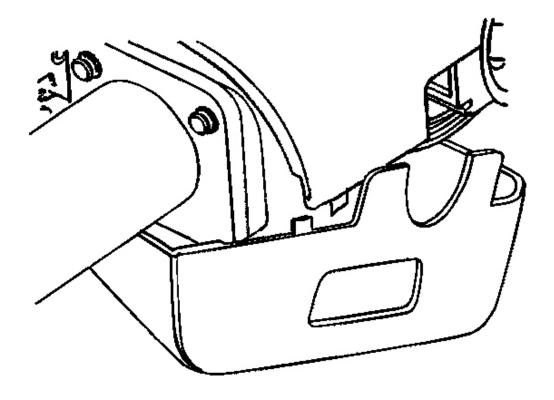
View Of Lower Steering Column Cover Courtesy of GENERAL MOTORS CORP.
